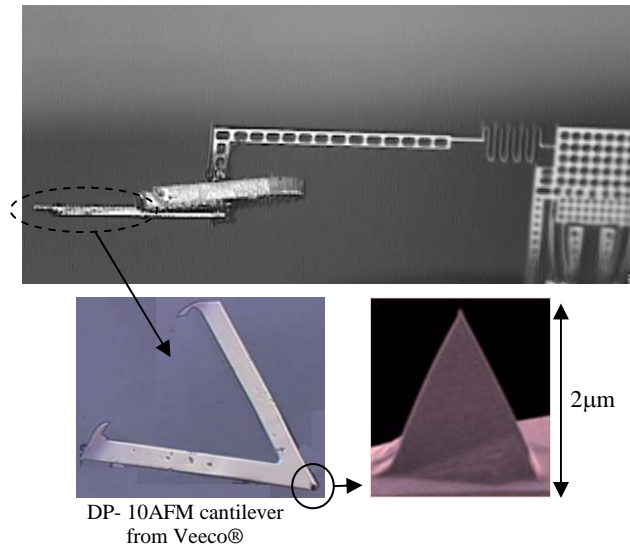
AFM probe mounted onto microrobot using a micro fixture.
